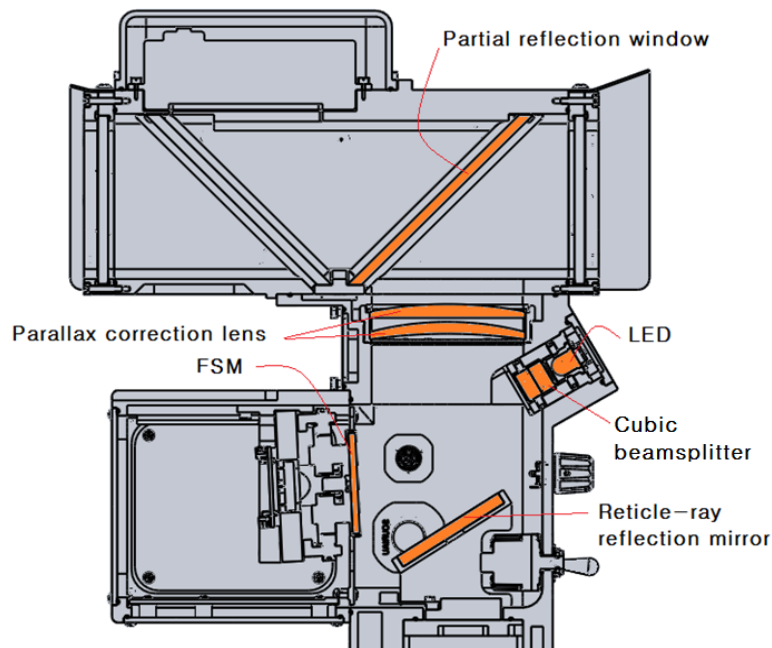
Sectional view of the developed optical sighting system showing the relative positions of optical components.
